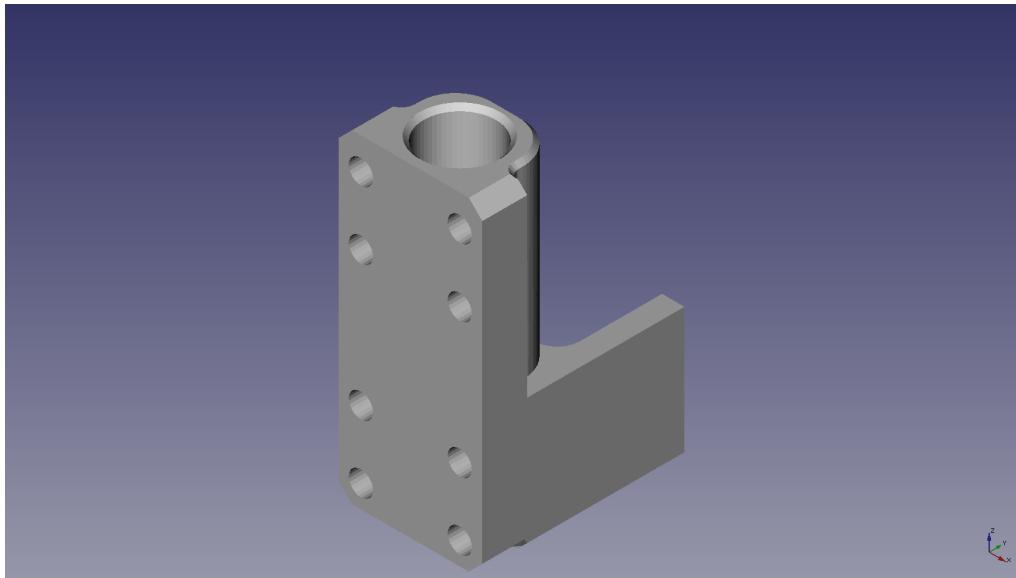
Begonia 3D Printed Extruder Mt Top Double Bearing Holder Render
